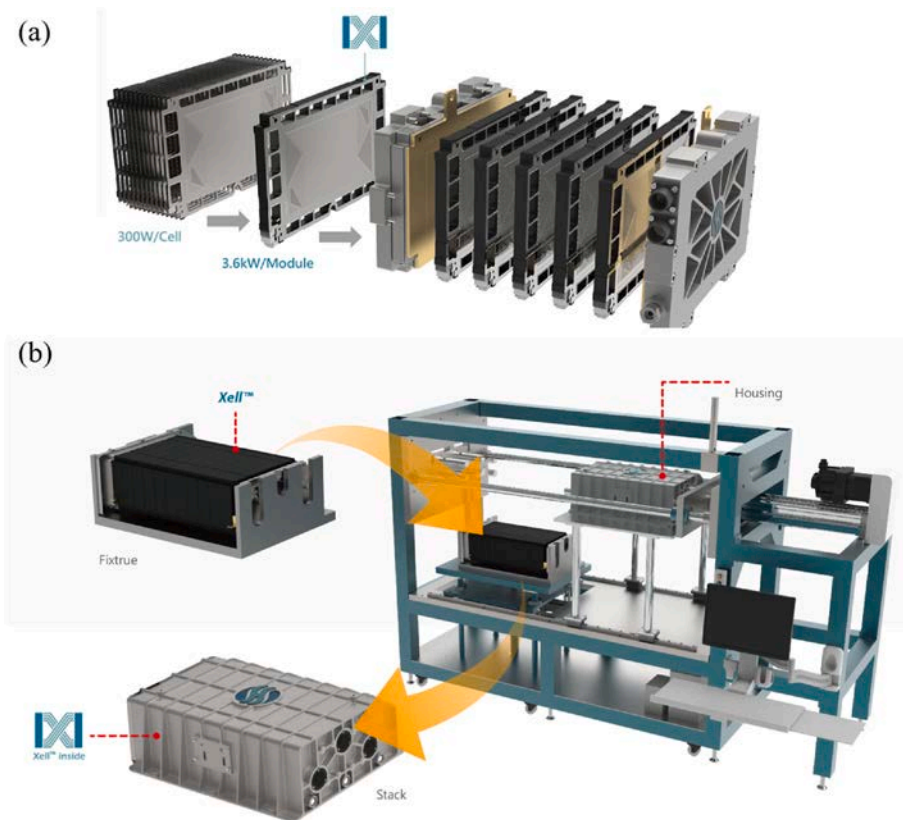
Integrated assembly technique: (a) Xell™ Inside stack, (b) horizontal servo stack assembly machine [250].
